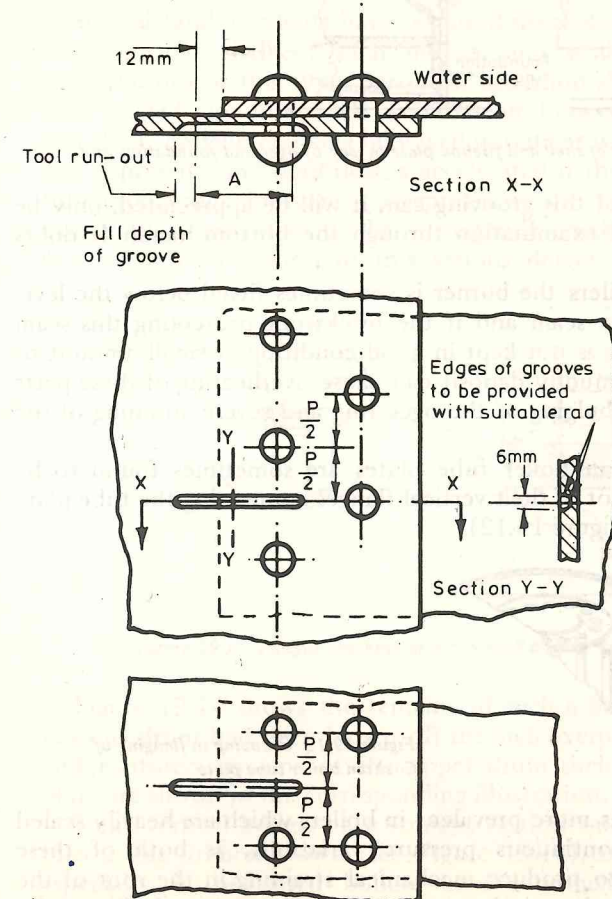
Tell-tale grooves for revealing cracking in boiler shell plate
